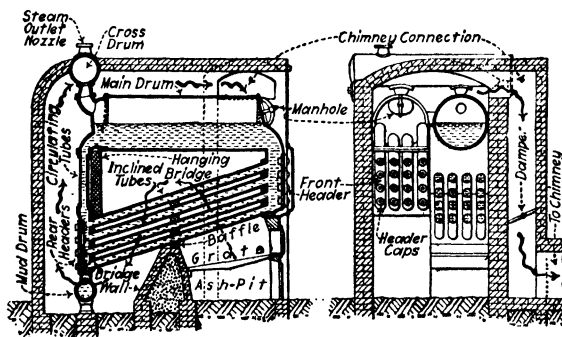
Early form of Babcock and Wilcox boiler (year 1870).
